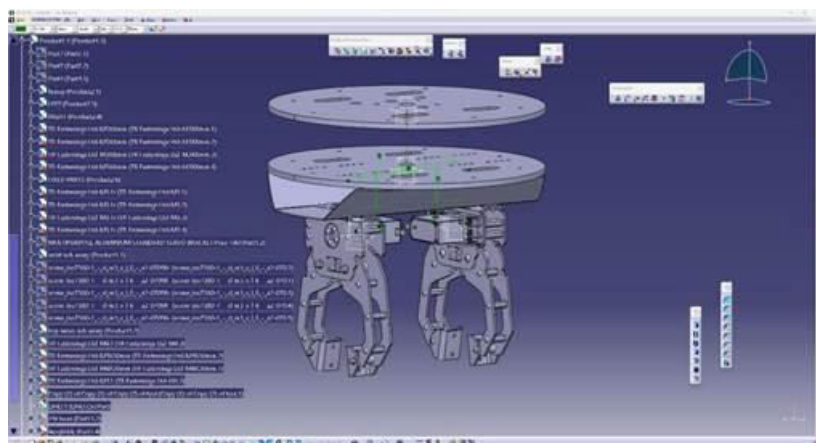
CAD Model of Multi-Layer Robotic Platform with Dual Gripper Assembly
